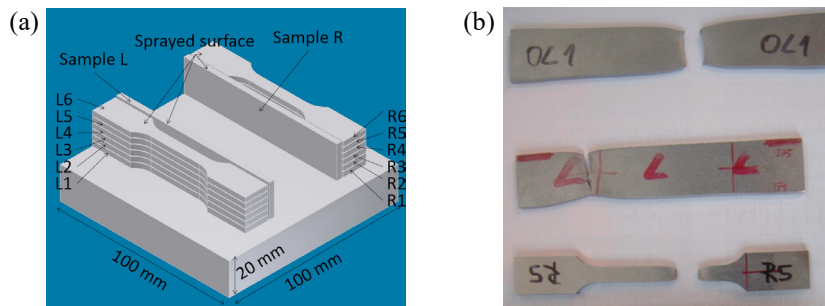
(a) Scheme of cut heat treated sample, (b) Example of samples after tensile tests.
